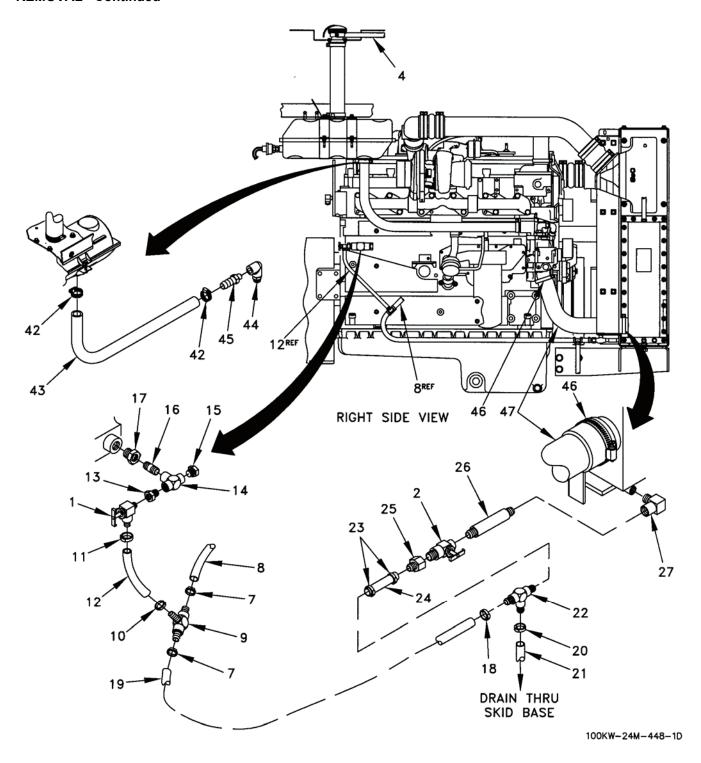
Coolant Hose Assemblies (Sheet 1 of 2).
